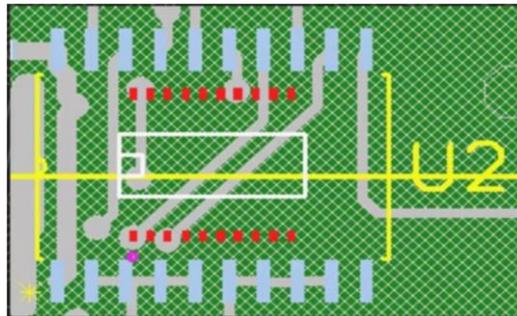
The component is not the same size as the PCB footprint for the U2 SMD integrated circuit
